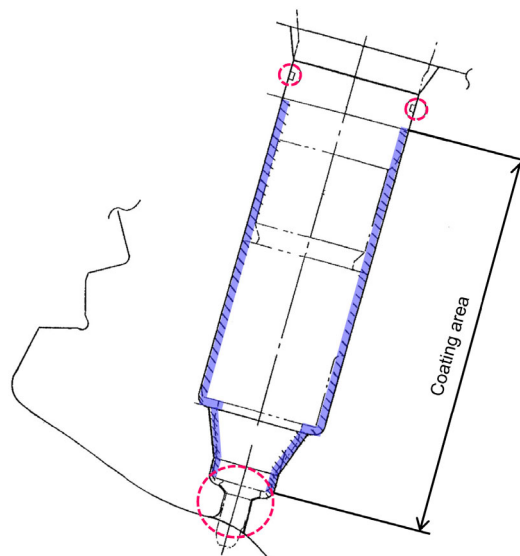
Painting procedure (Do not apply to the seat surface, nozzle hole and near O-rings)
